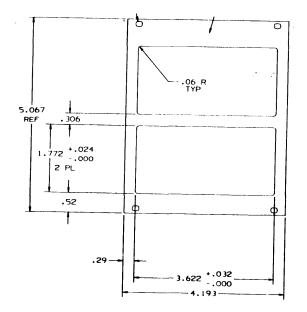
Dual 1/8 DIN Mounting Panel 814873-002;
